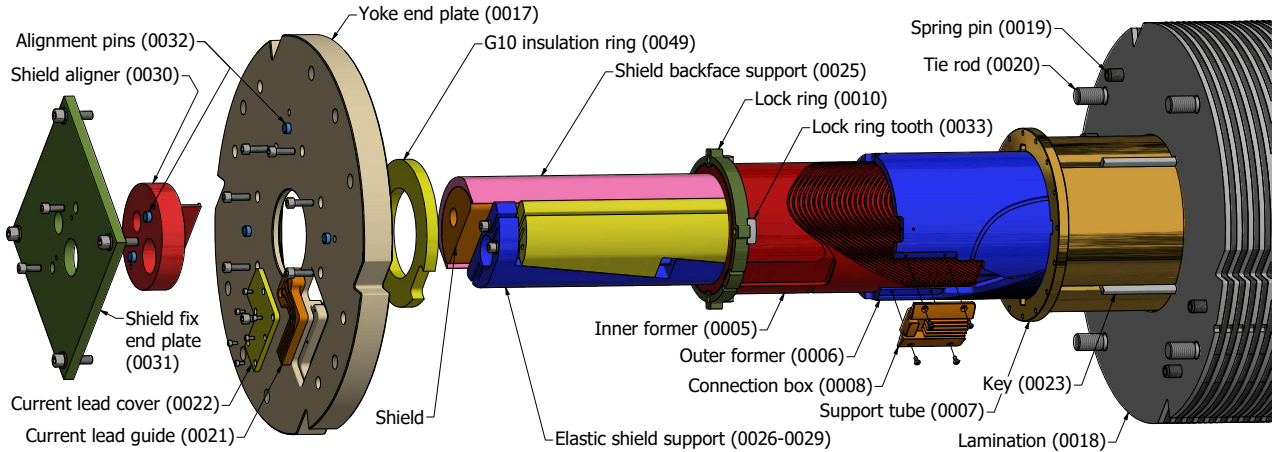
Exploded view of the CAD model of the SuShi septum prototype.
